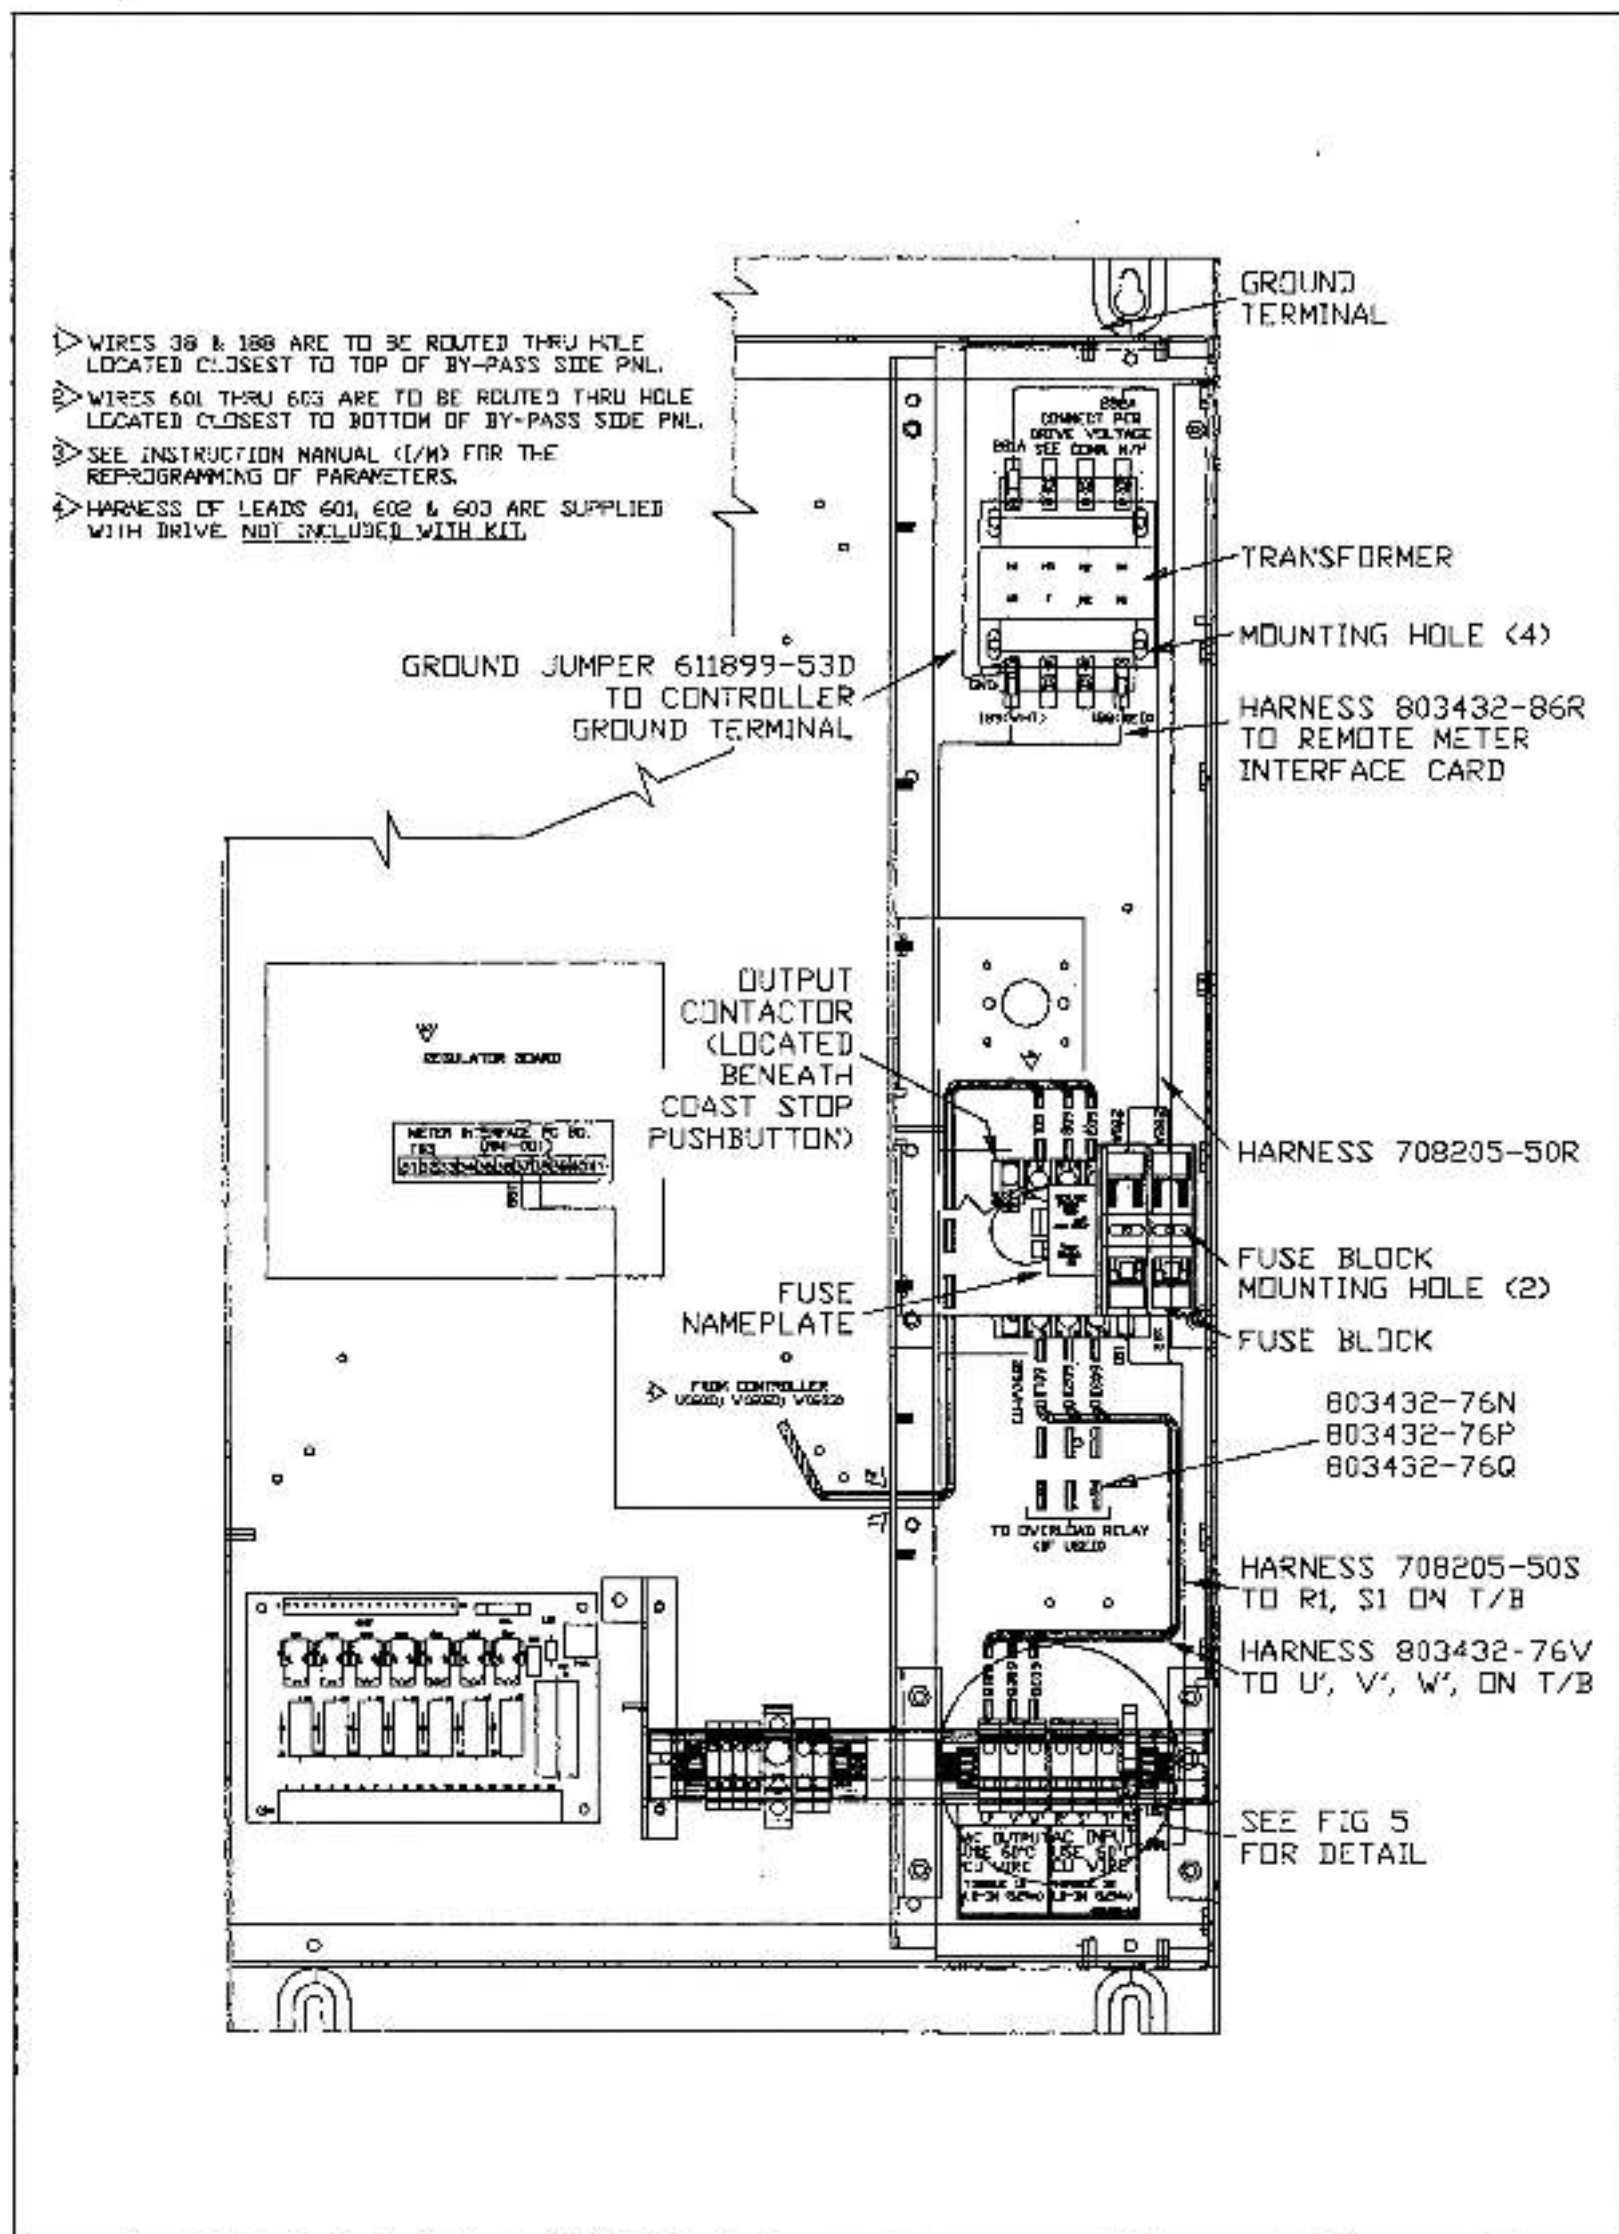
Contactor, Transformer, and Fuse Block Mounting Locations - 1-20 HP GP2000 with Expanded Cabinet or 1-20 HP VTAC V.
